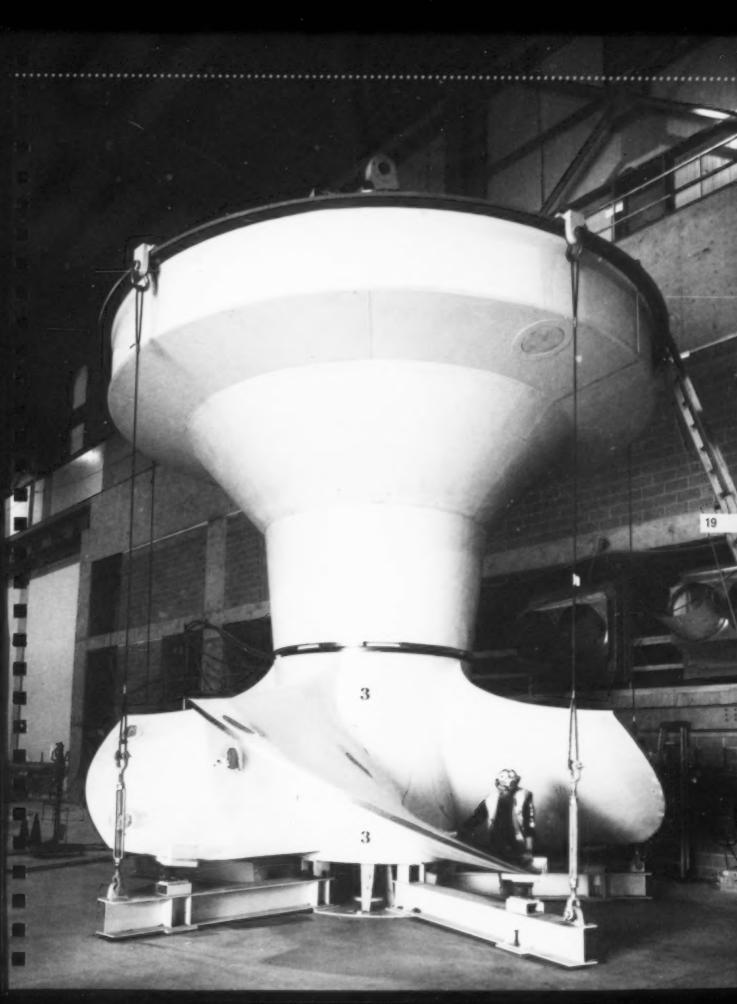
DETAIL FOR MARKING OF RUNNER AND BLADES AFTER ASSEMBLY
